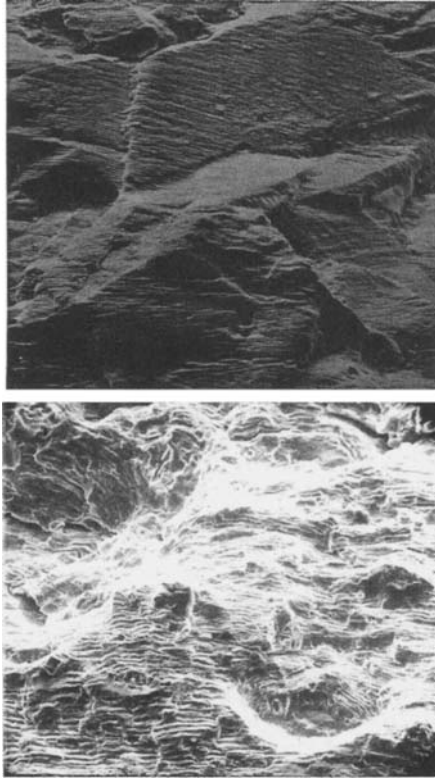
Fatigue fracture surface of a stainless steel 25-20 (top) and of a ferritic steel (X 5000) (bottom) [BAT 73]
